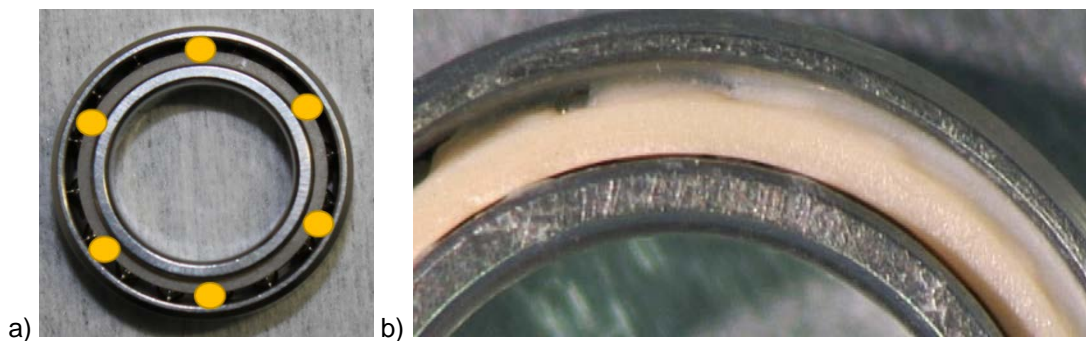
a) Half-section of Axis Bearing Assembly, b) Picture of Axis Bearing Assembly
